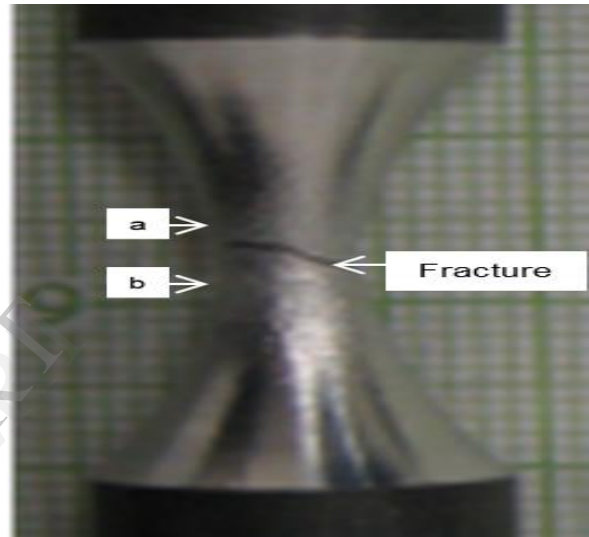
shows specimen after fracture and points of surface investigation using SEM.
